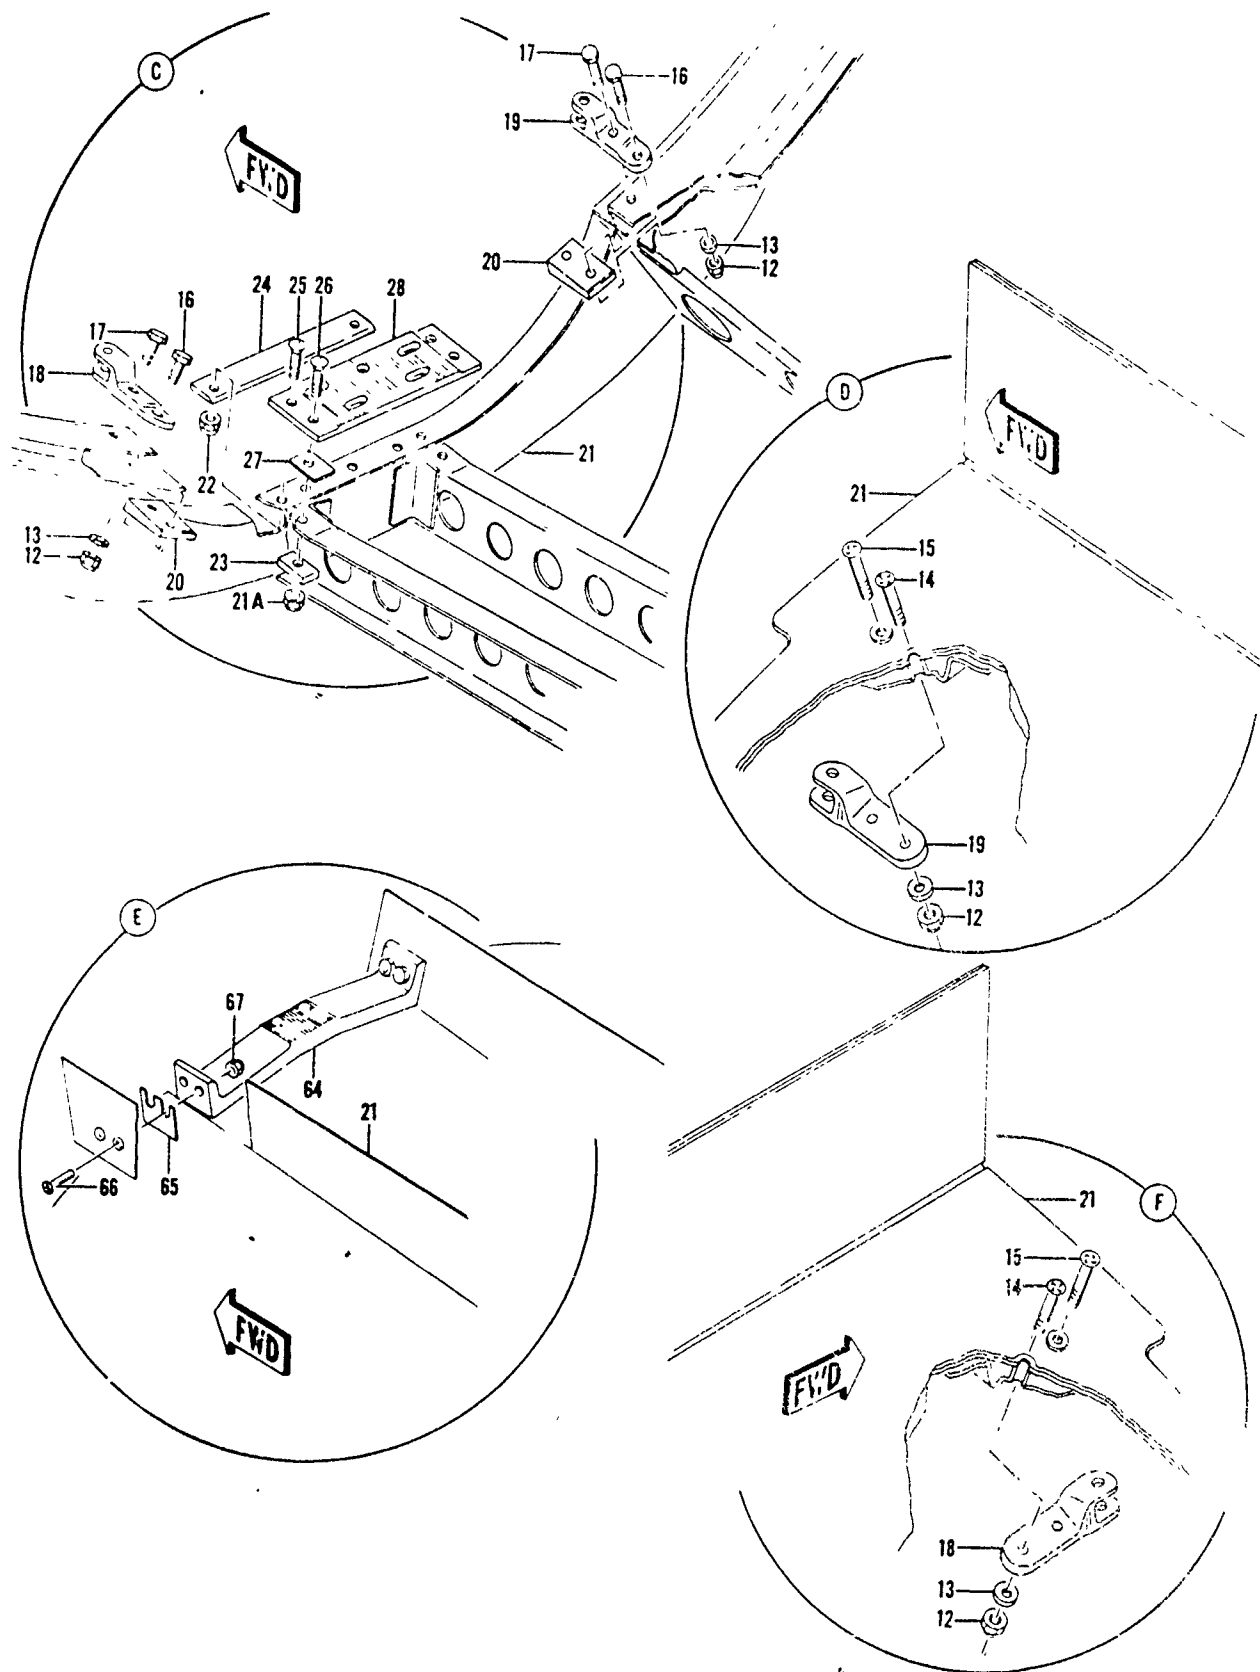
Aft Thrust Reverser and Sleeve Assembly (Sheet 2 of 3)
